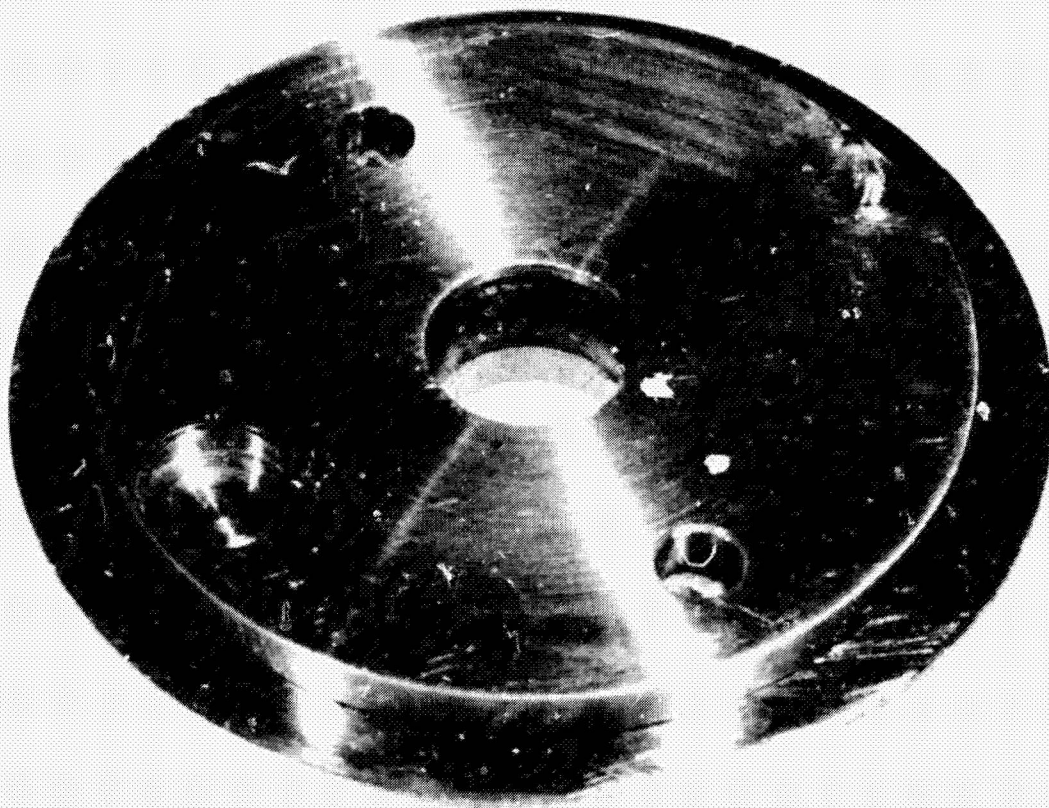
Modified Valve Piston Shaft Seal, P/N X27449, S/N B Valve
